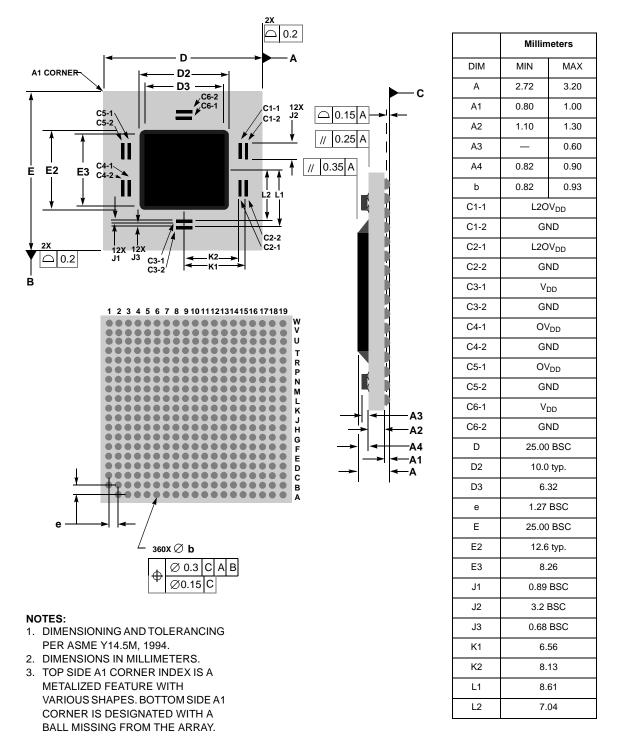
Mechanical Dimensions and Bottom Surface Nomenclature for the MPC7410, 360 CBGA
